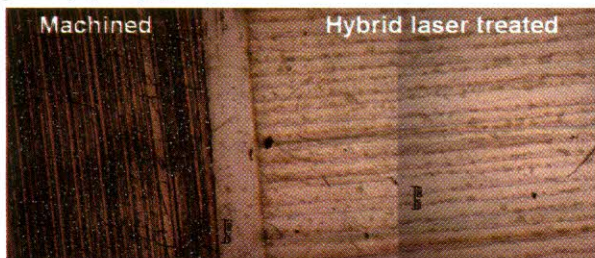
Partly hybrid laser treated surface of SCC-damaged 304L SS specimen.
